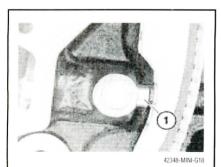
Showing the released position of the timing chain clamping fixture (with tension on the timing chain)-Cooper Coupe
